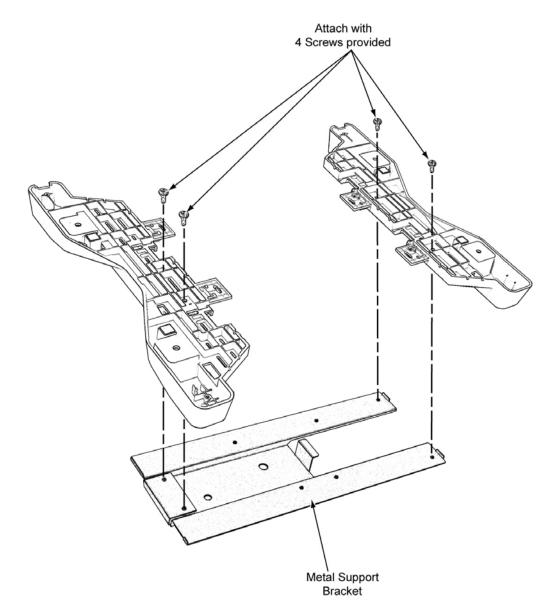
9.5" Mounting Brackets and Metal Expansion Fitting
